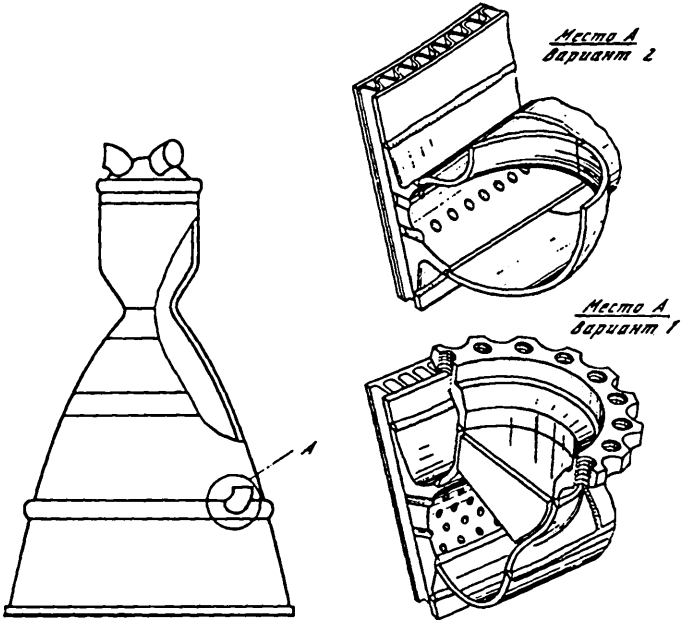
Soldered-welded chamber designed by the GSL-EDB
